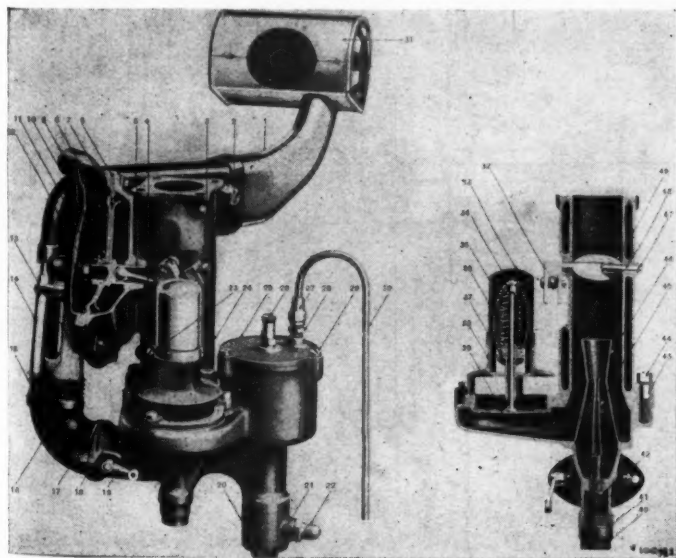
Section through Packard carburetor showing cut-away view at right of air valve assembly
